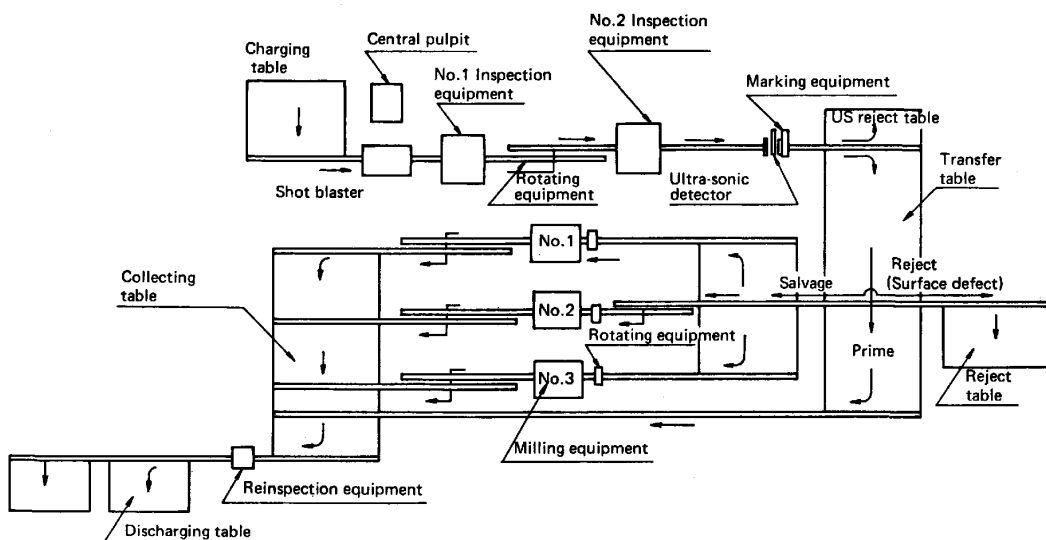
Schematic layout of full automatic inspection & removal system for the defects of square billets.
